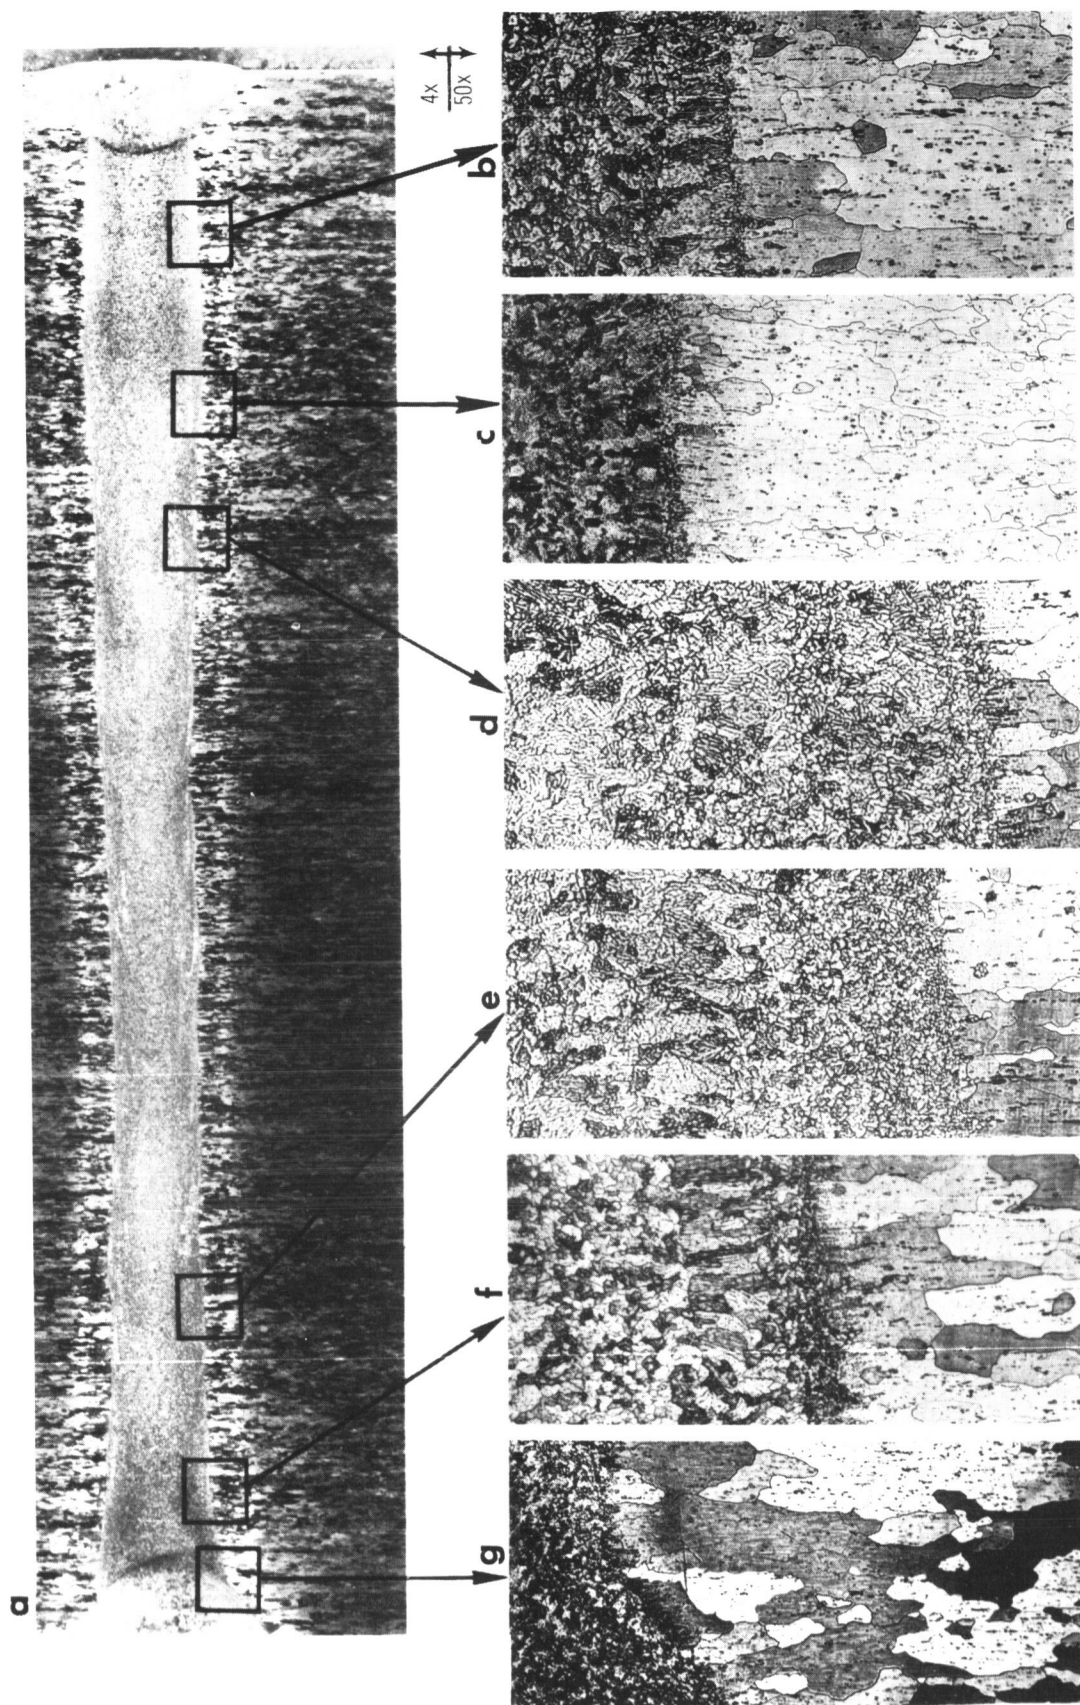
CROSS SECTION OF EB WELD IN 2-3/8-IN. 2219-T81 PLATE (a) AND PHOTOMICROGRAPHS OF INTERFACE AREAS (b THRU g).
